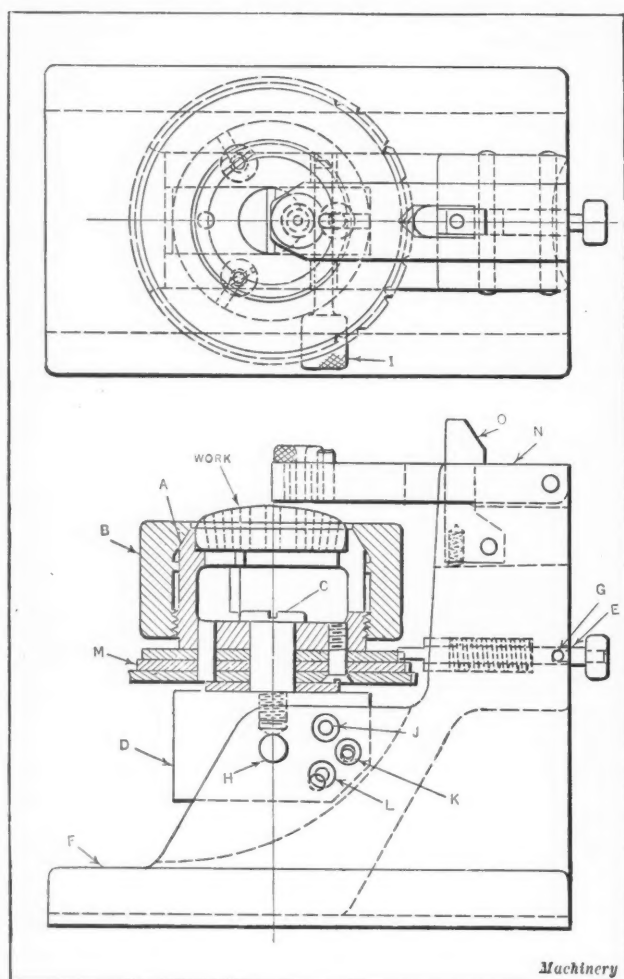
Jig for Drilling Part Shown in Fig. 2
